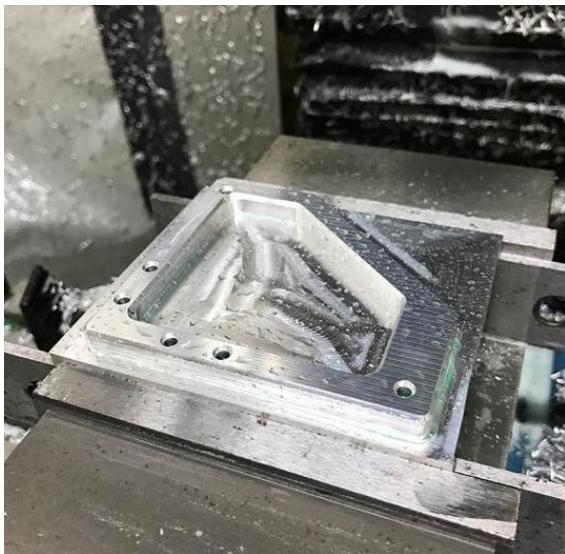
CNC machining motor mount with adaptive clearing toolpaths.
